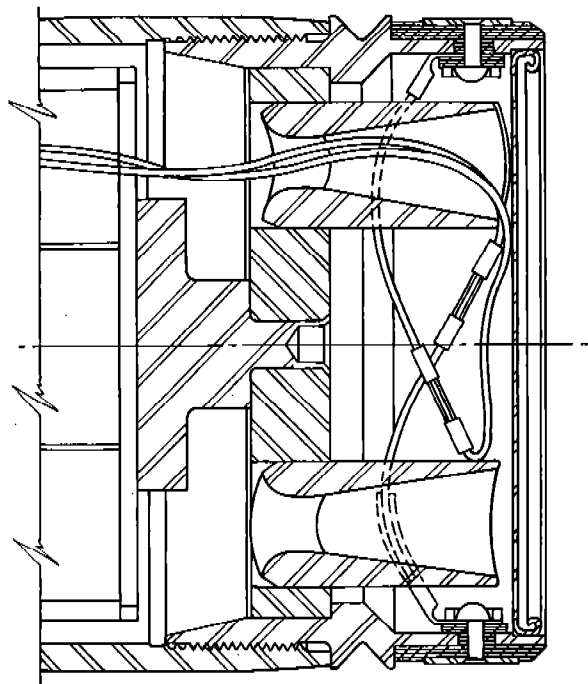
Details of nozzle end of 5.0-in. spinner motors with cruciform grain.
